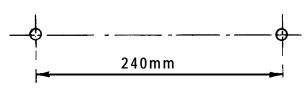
WALL MOUNTING FOR CALL METERING UNIT
